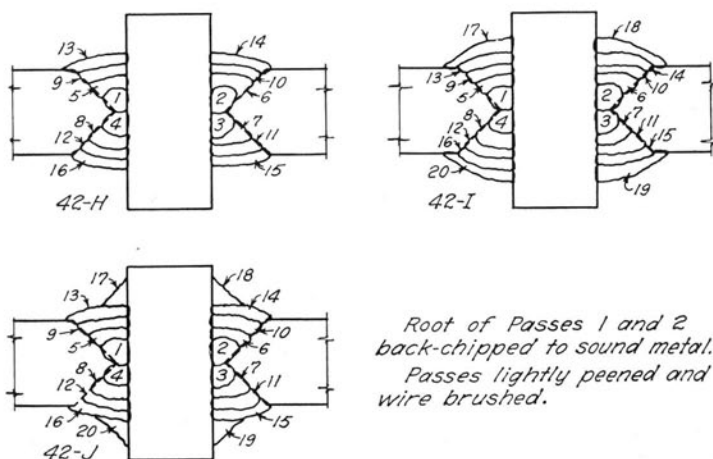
DETAILS OF T-BUTT WELDS
